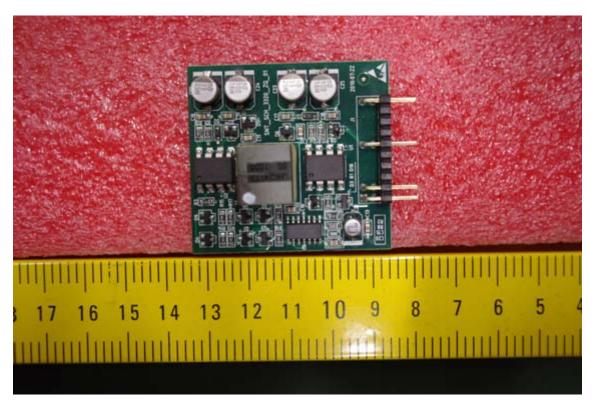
Board SNT_PCB_3320_ZQ, component side view
